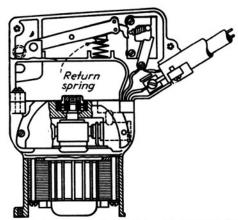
A conventional-type switch of old design that is self-opening when the trigger is released but can be held in the closed position by means of a locking pin. Common to all the switches shown in this group of designs, it is not dustproof.
